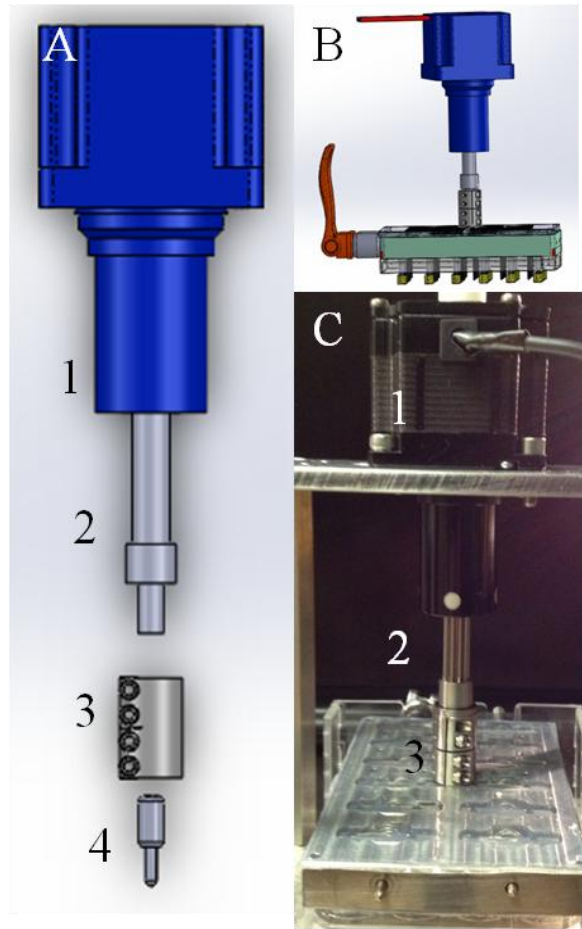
Overview of the motor-lid coupling mechanism. (A) SolidWorks[®] exploded view with the linear actuator (1), loader rod (2), shaft coupling with the four set screws (3), and thumb screw (4). (B) SolidWorks[®] side view of the motor and the lid connected. (C) Actual view of the linear actuator (1) and its rod (2) connected to the lid with the shaft coupling (3).
